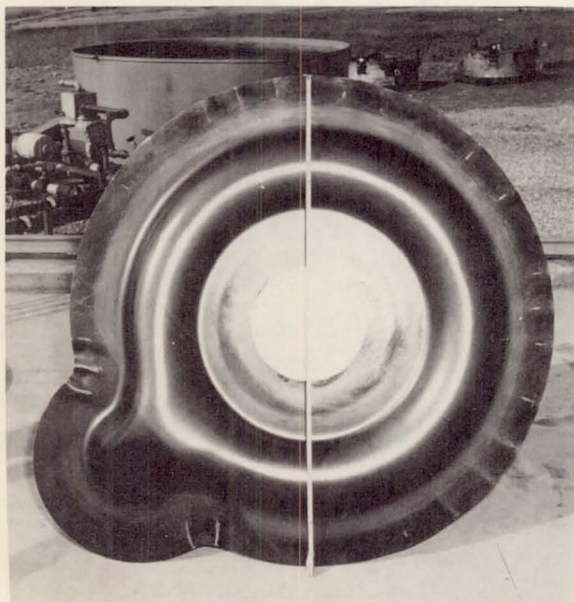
Explosively formed F-1 exhaust nozzle. (Courtesy Rocketdyne.)
